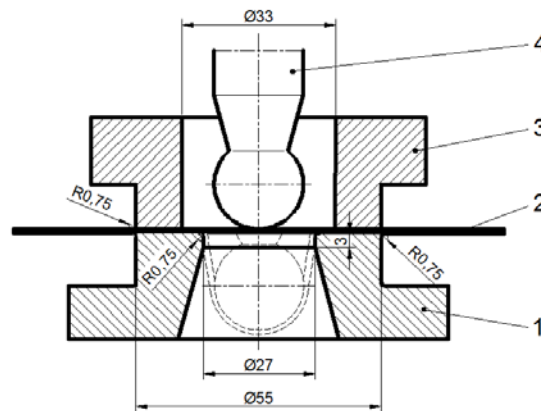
Experimental set-up of the Erichsen test (1- Die, 2- Sheet metal, 3- Blank Holder, 4- Punch)
